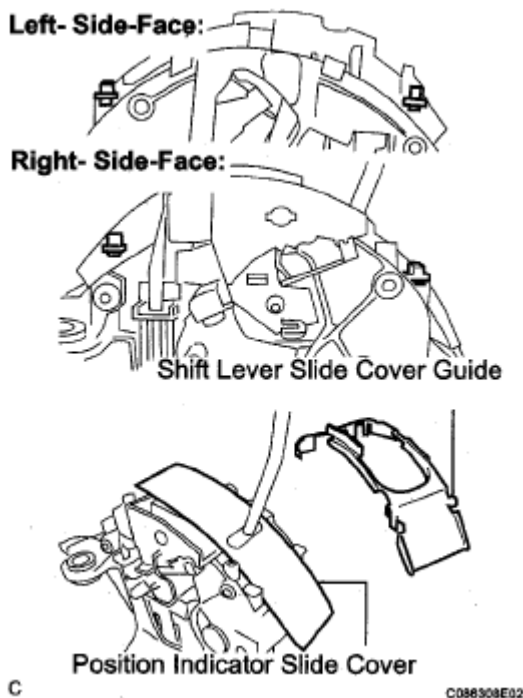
Identifying Position Indicator Slide Cover And Shift Lever Slide Cover Guide
